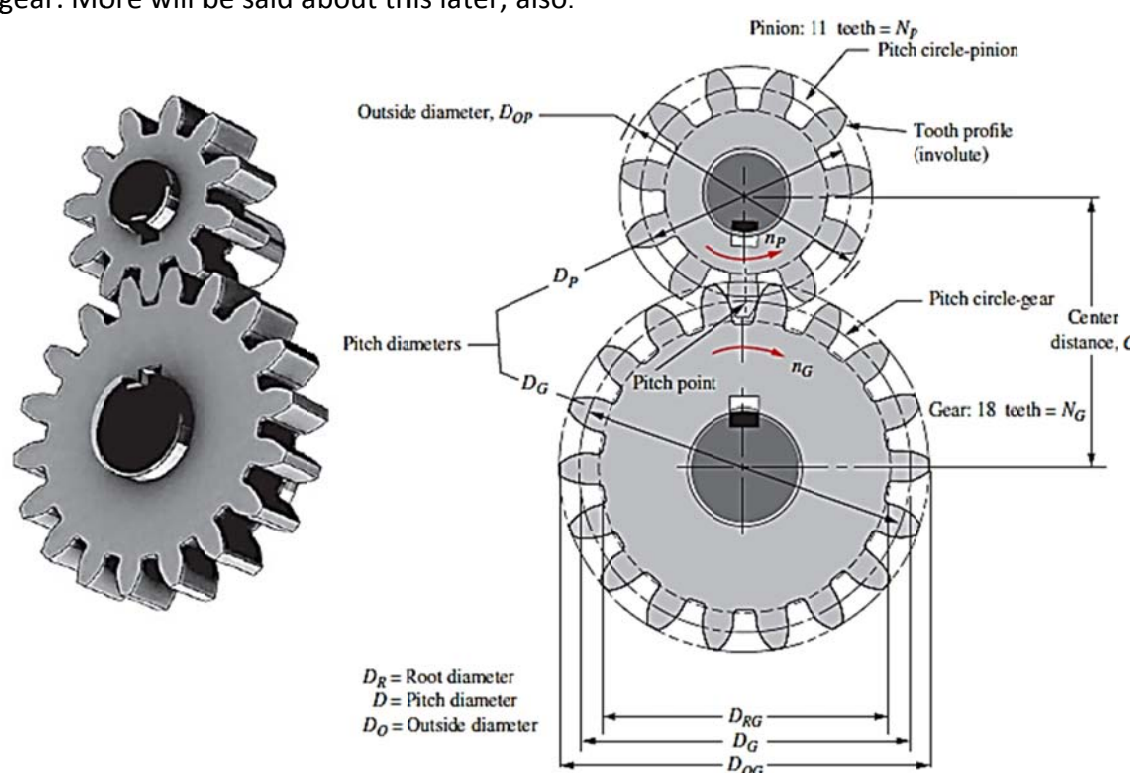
Pair of spur gears. The pinion drives the gear.
